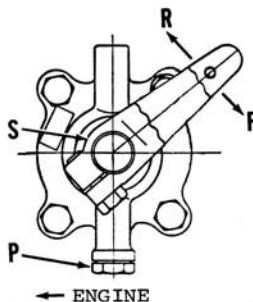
Install shifter assembly in case with plug (P) pointing down. Position shifter lever (S) on shaft at a 45 degree angle checking that there is an equal amount of travel in both forward (F) and reverse (R) directions.
